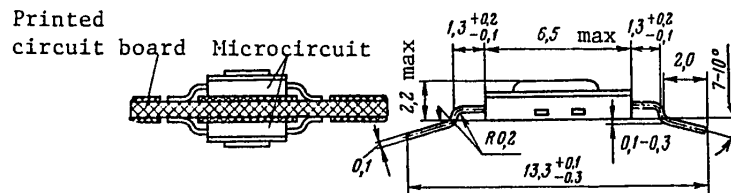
Two-sided mounting of microcircuits on a printed circuit board.
